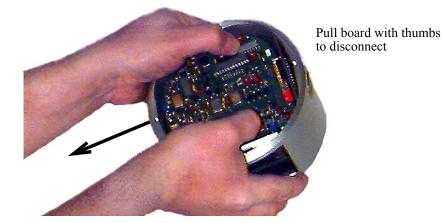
Gently slide the main board's edge connector away from the DB-25 plug. Remove the board from the base.
